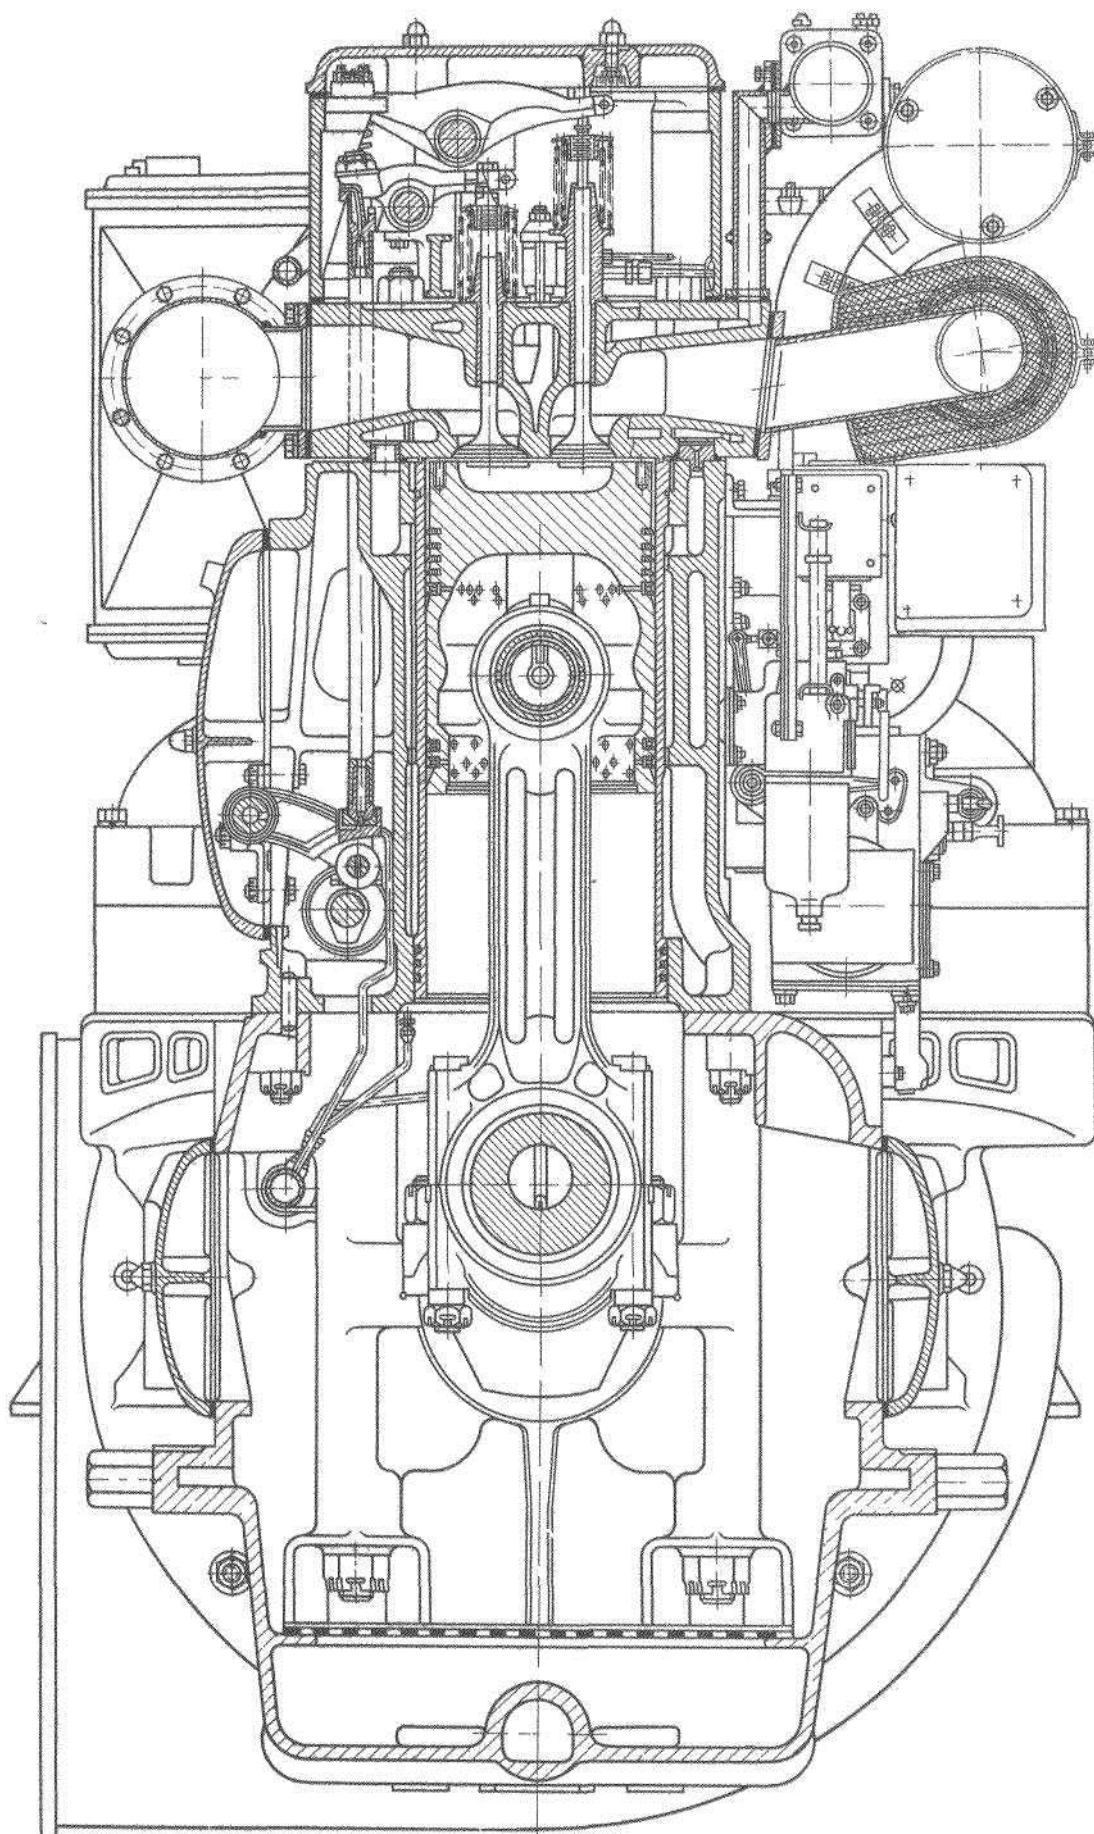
Cross-section of the engine 6CHN 31.8/33
